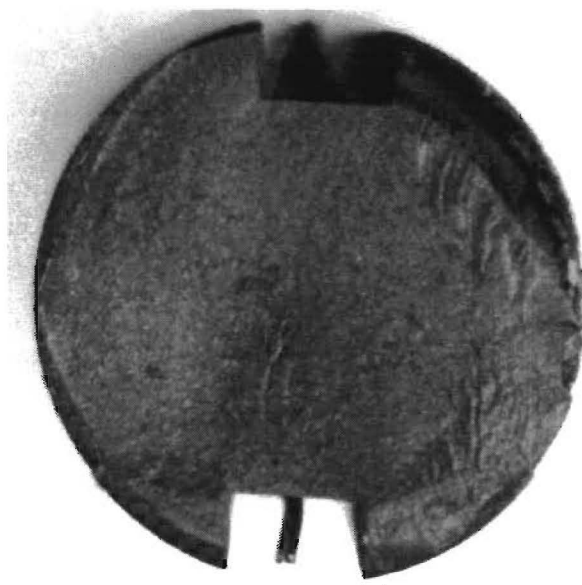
Photograph of fatigue crack surface in bolt A after third fatigue test.
